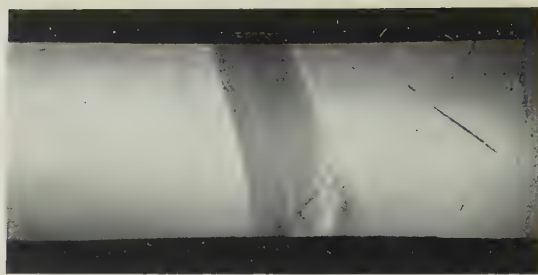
FIG. B.—Illustrating Formation of Tongue-Shaped Markings on Further Stretching of Test-Piece. $\times 1$. (*Chadwick and Hooper.*)
